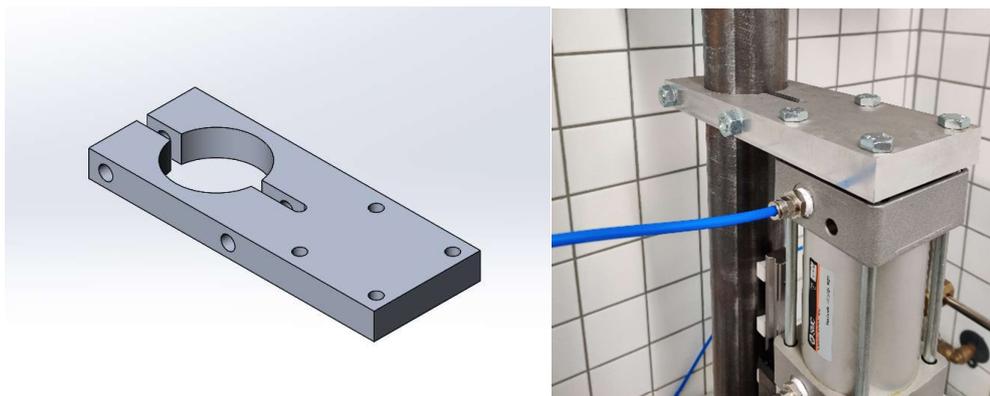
Height adjustment model in Solidworks® (left) and manufactured part (right) with pneumatic cylinder secured in position on the circular tube.
